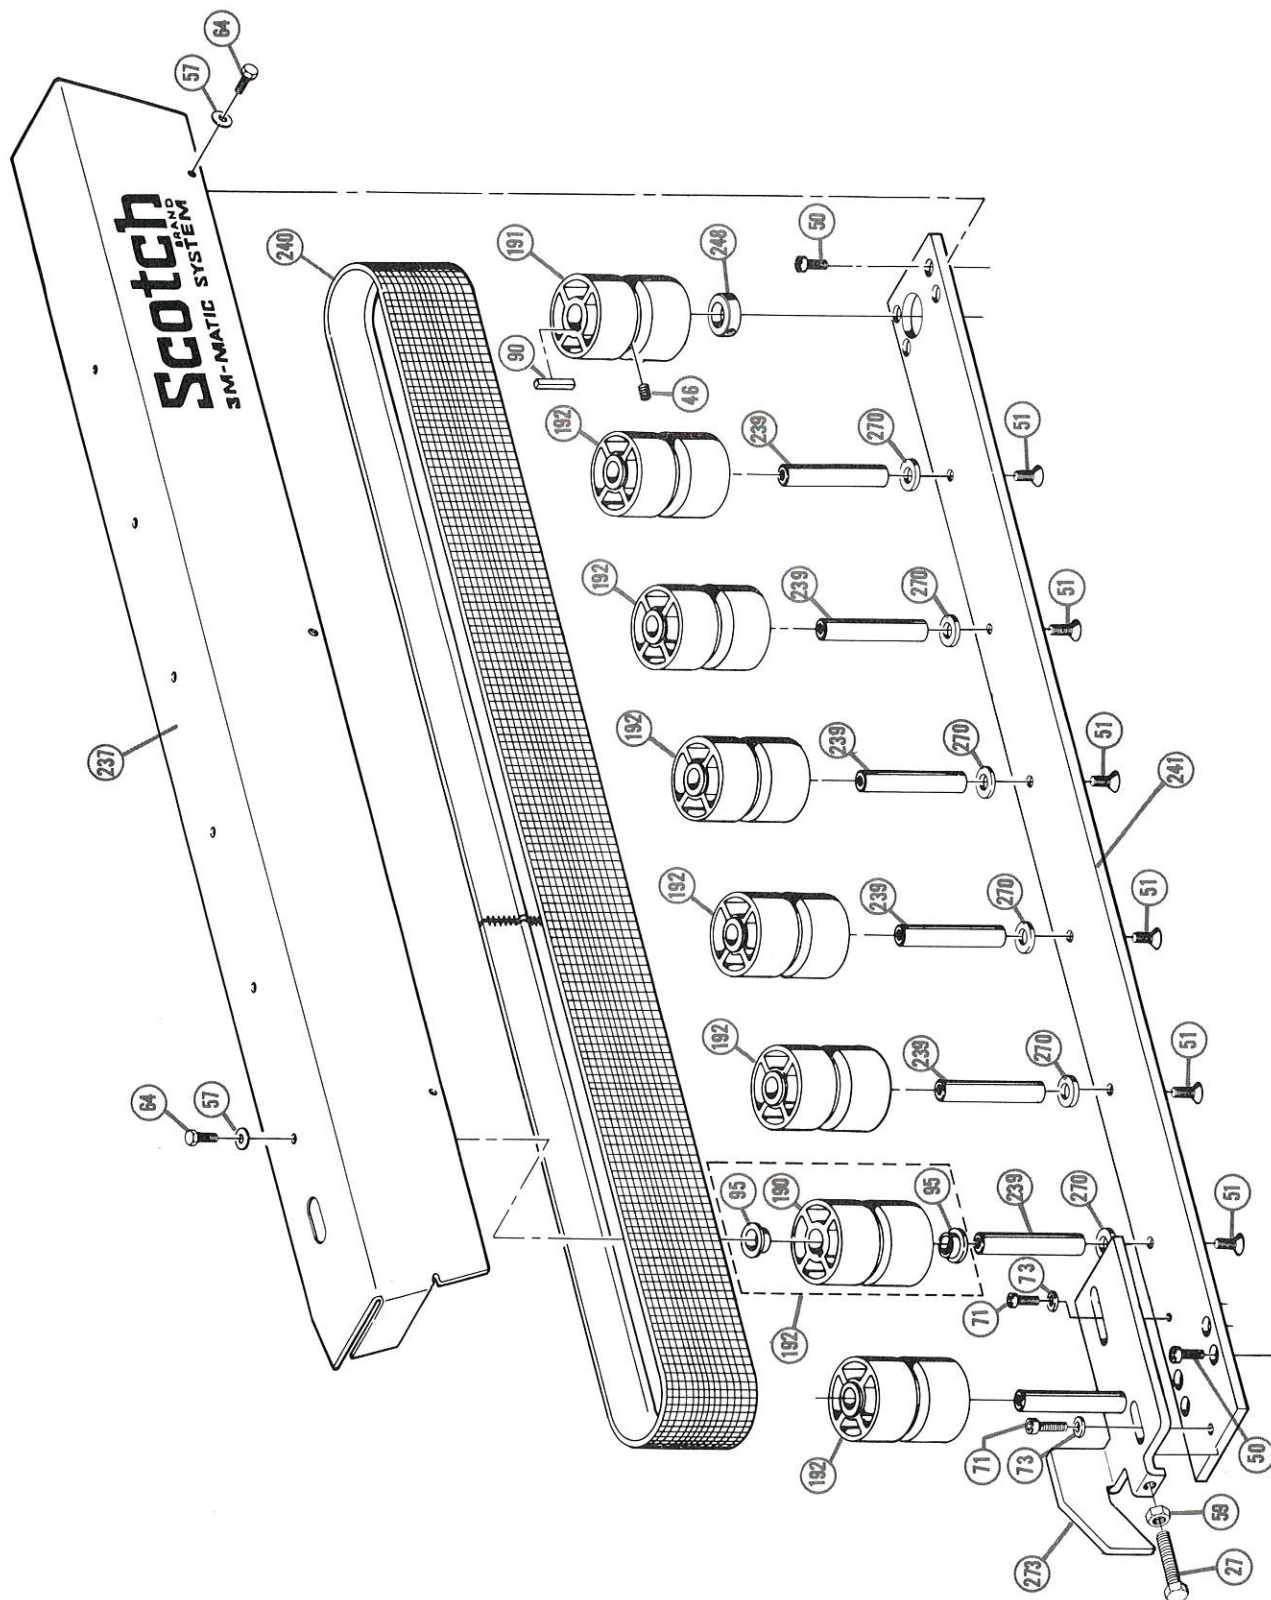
RIGHT SIDE BELT DRIVE ASSEMBLY
